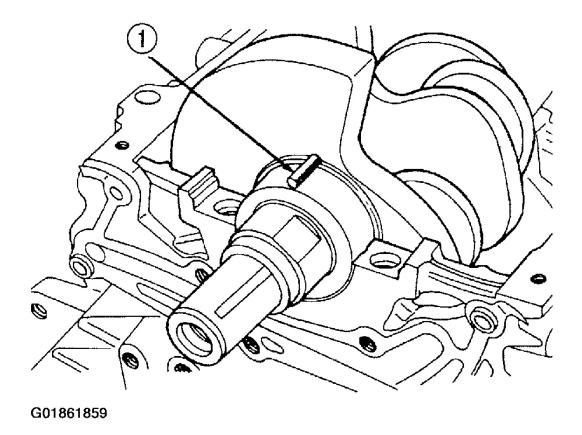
Placing Plastigage® Across Bearing Shell Courtesy of DAIMLERCHRYSLER CORP.
